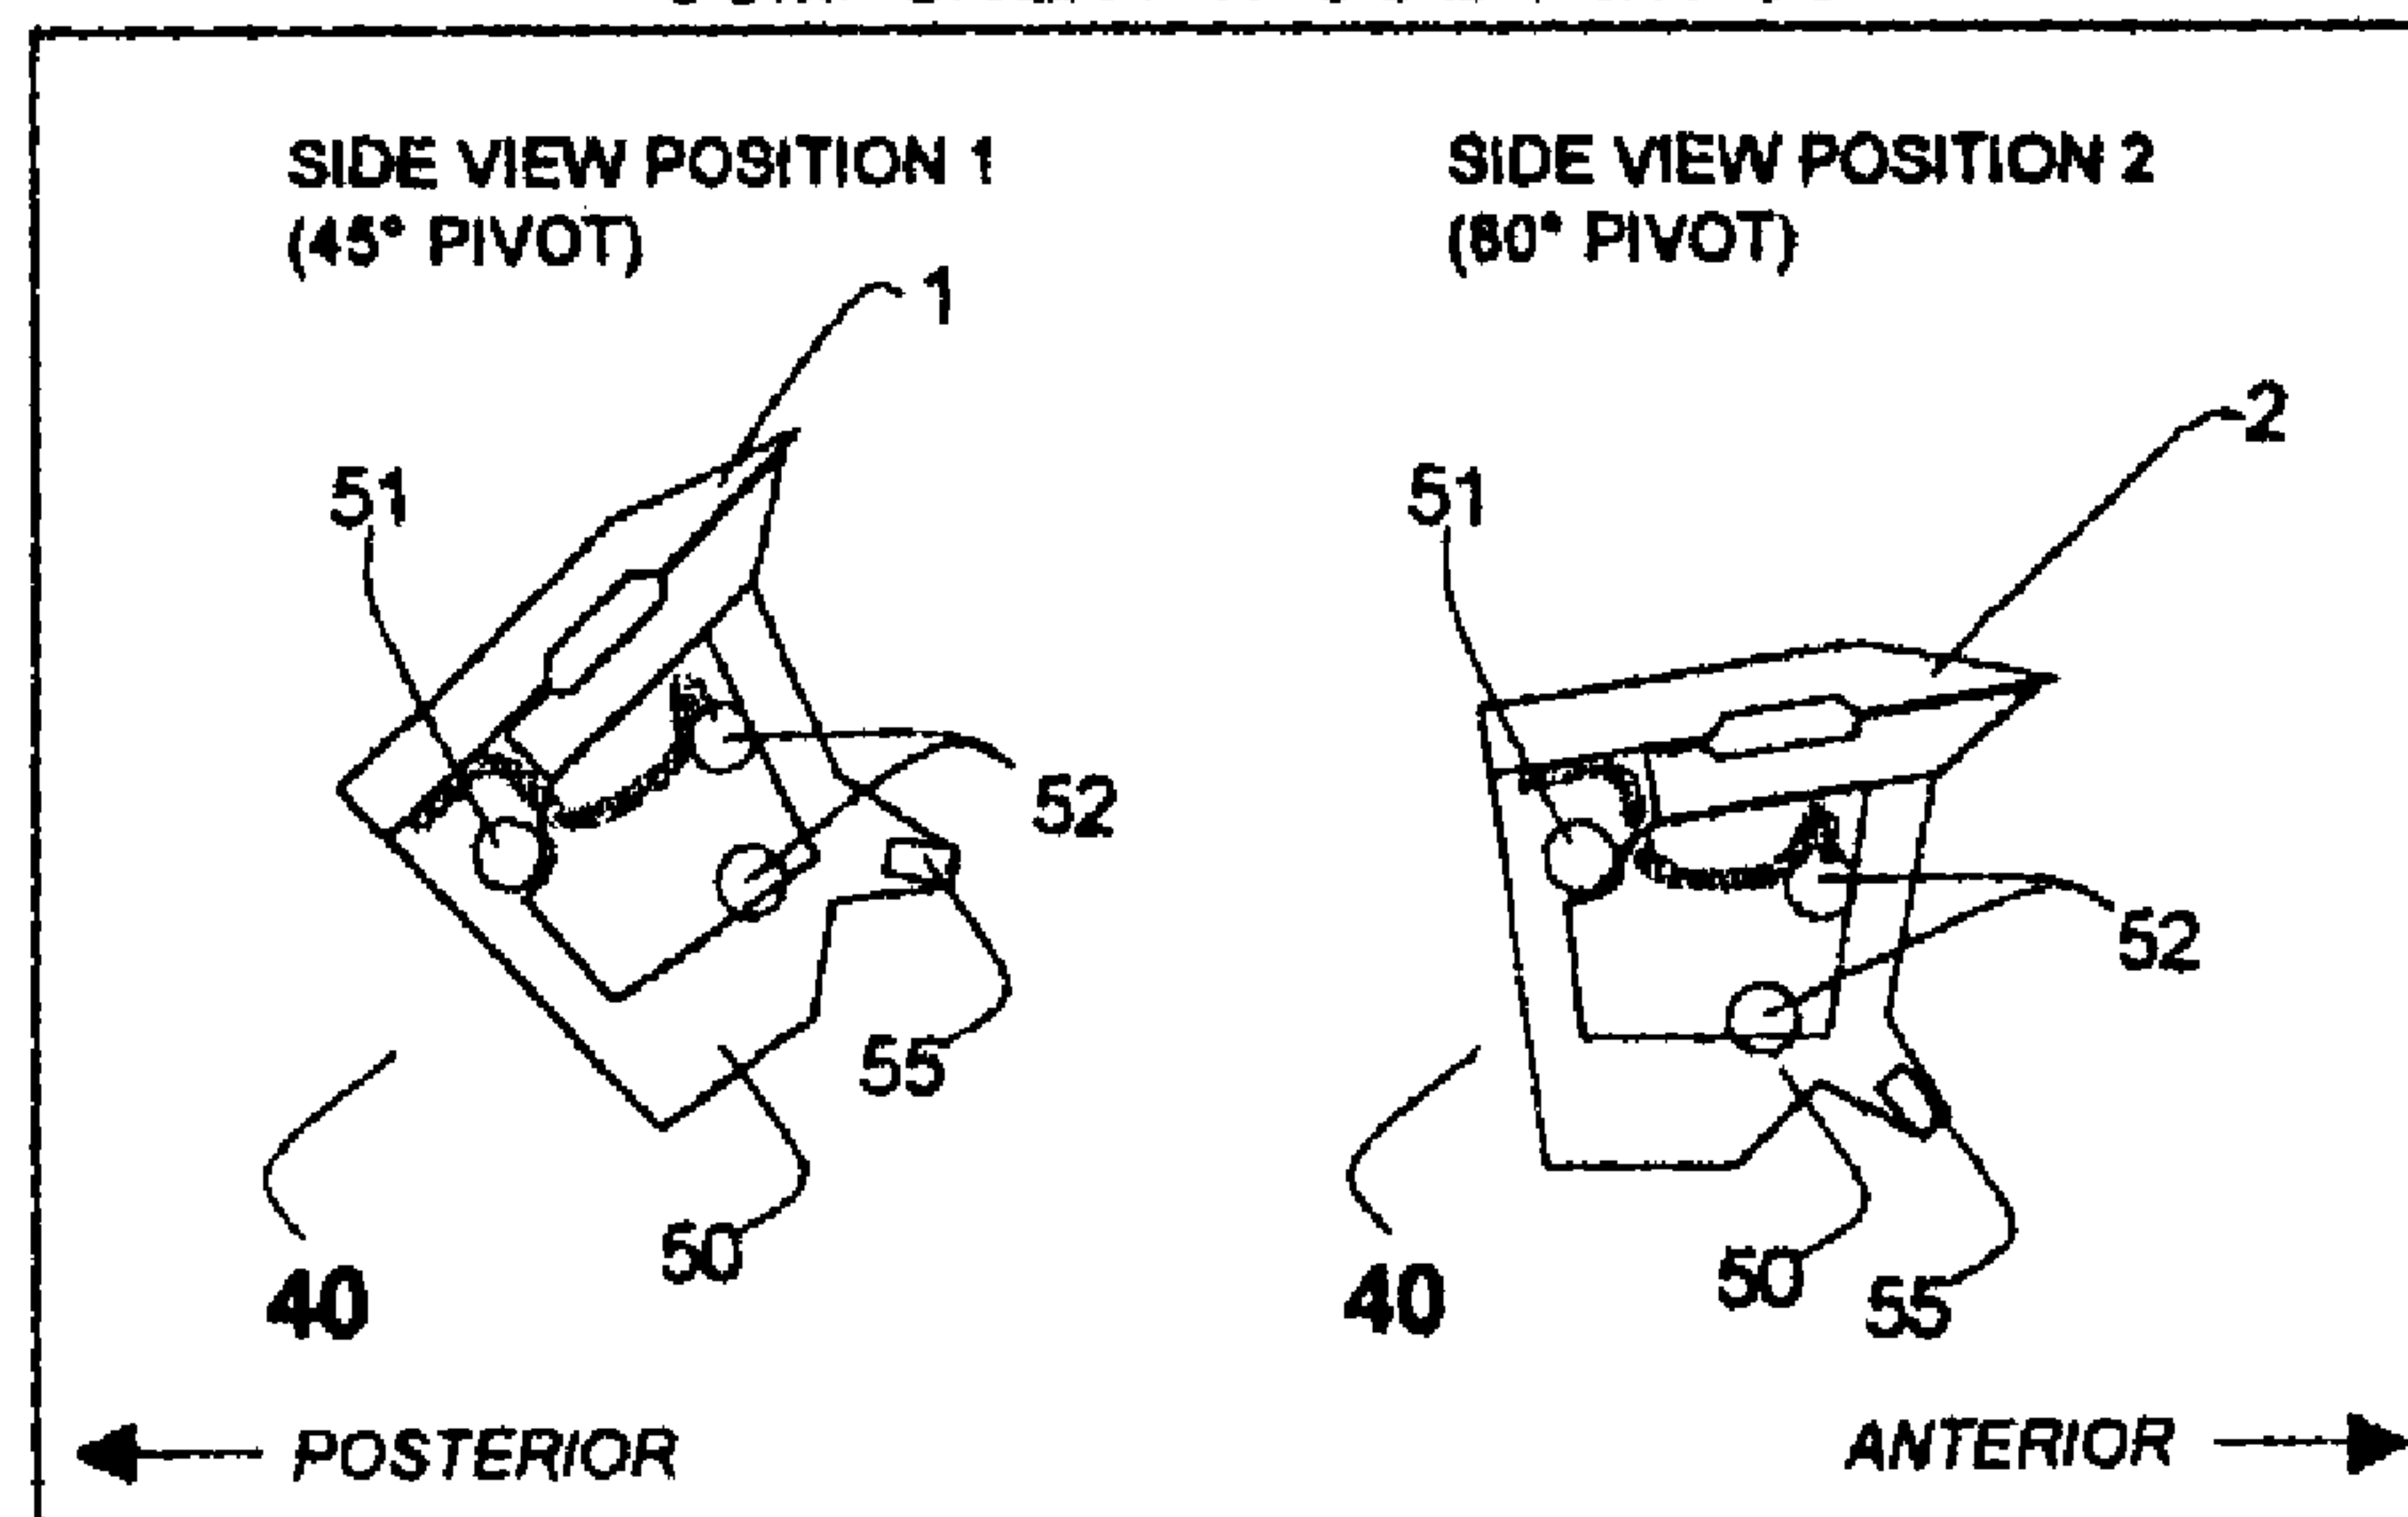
BLADE ASSEMBLY POSITIONS:
